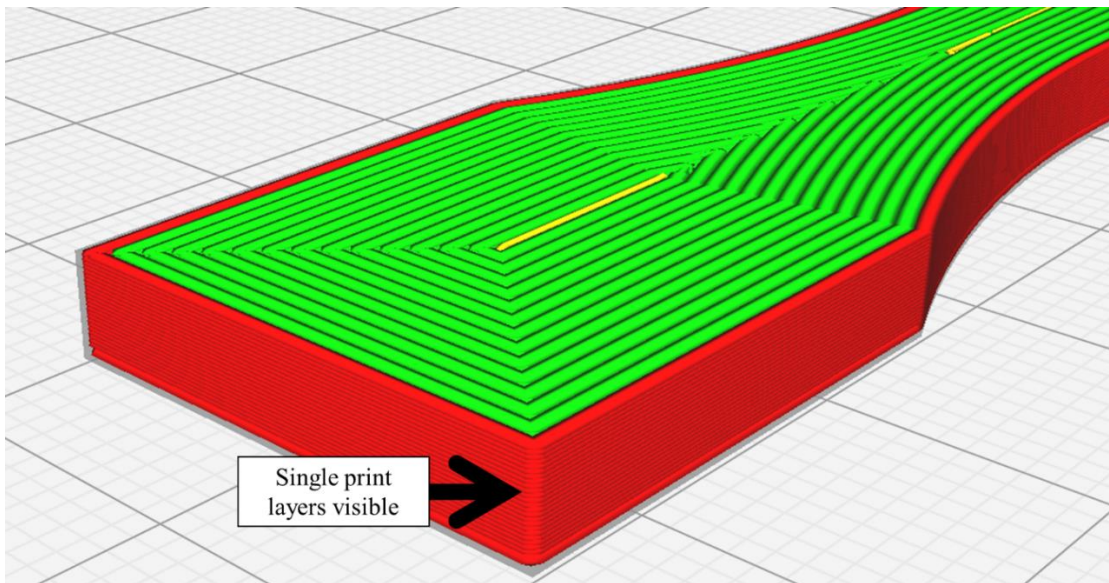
Single print layers, as per selected print settings, ready to be exported to the 3D-printer.
